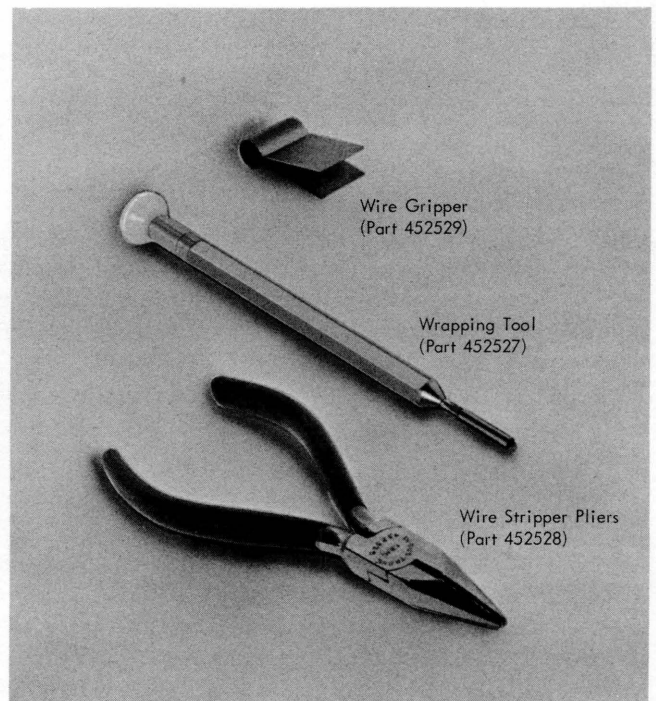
Tools for Installing Solderless-wrapped Terminations
